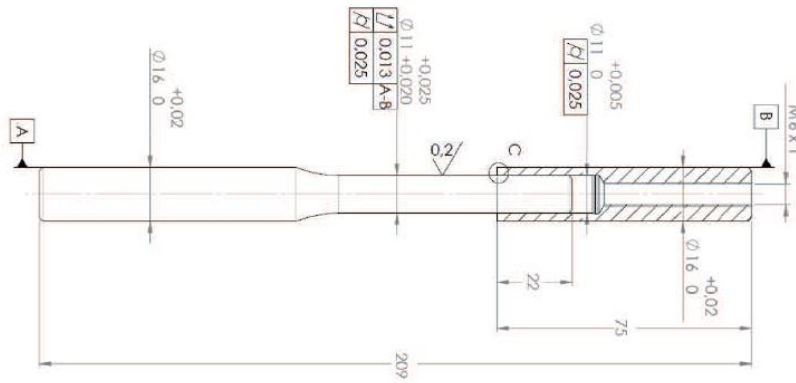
Shaft-hub specimen for rotating bending fatigue tests [1.21]
